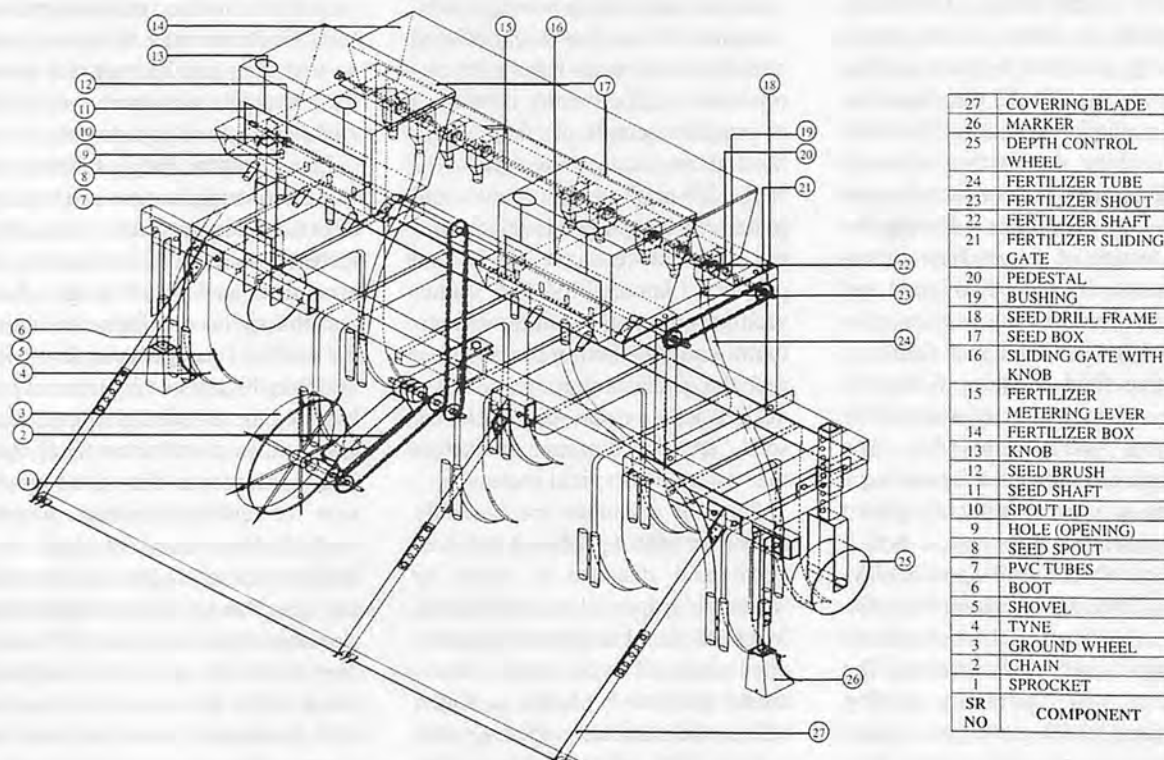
Tractor driven seed-cum-fertilizer drilling attachment.
